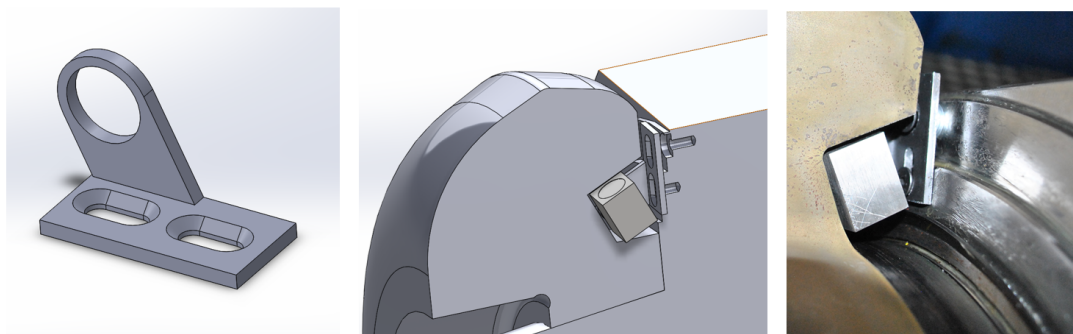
UT mounting bracket: CAD models of bracket (left) and assembly (centre). Manufactured bracket in place (right) with UT and sectioned roller (see Section 6.4).
